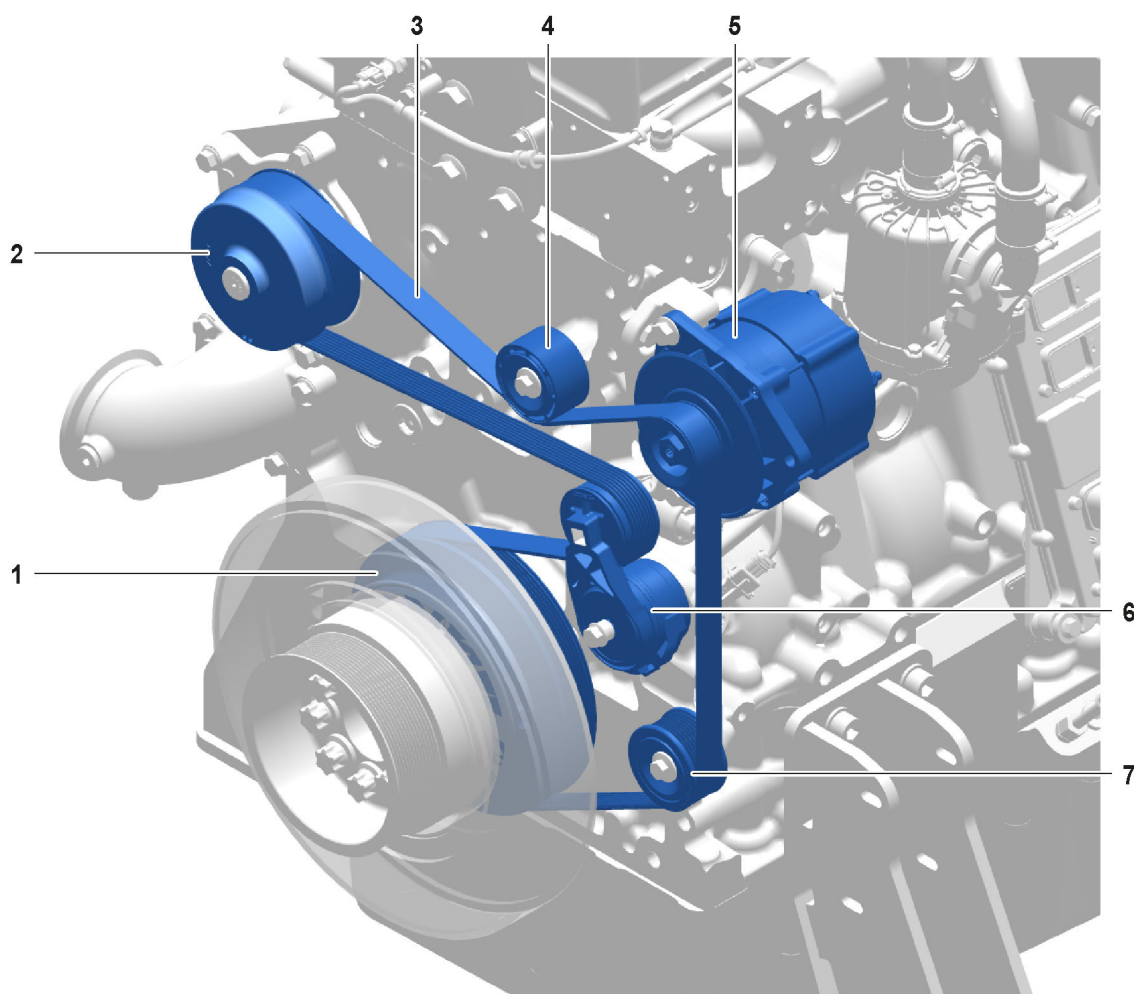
Checking the belt drive for coolant pump and alternator for battery charging
